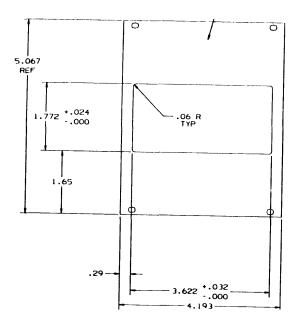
Single 1/8 DIN Mounting Panel 814873-001;
